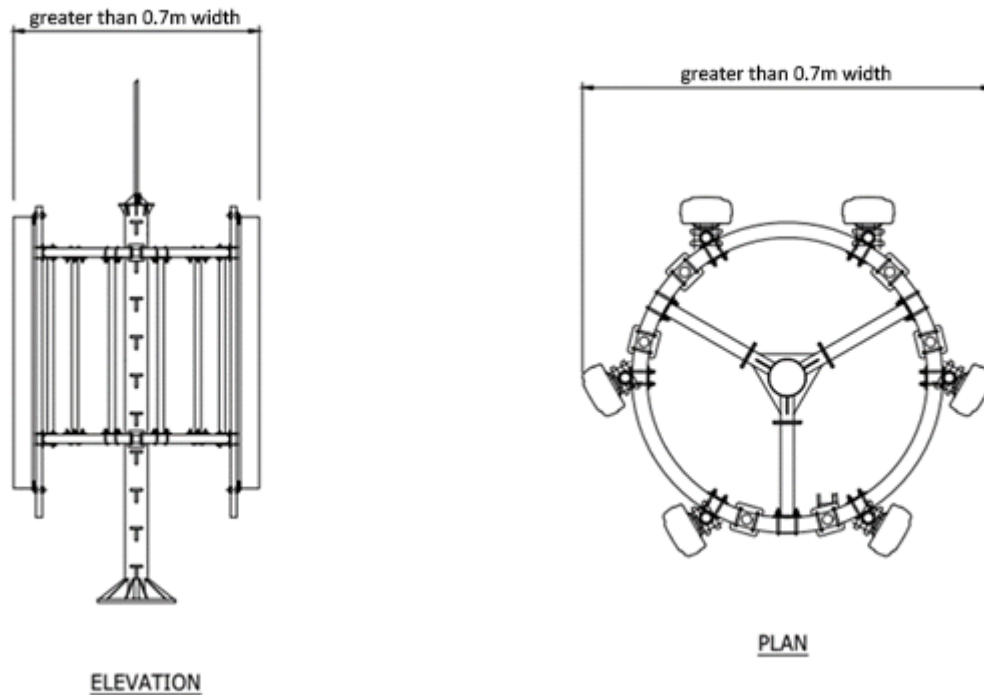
Elevation and plan views of headframe used to attach antenna to a pole
